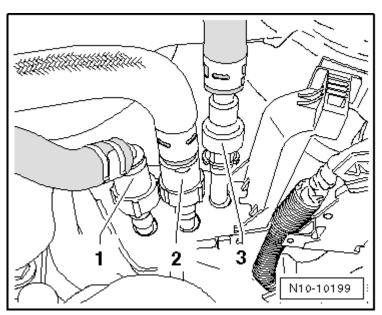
Identifying Breather Line, Vacuum Line & Fuel Supply Line
